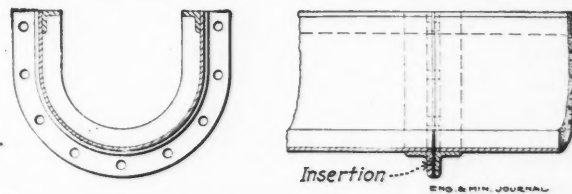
DETAILS OF STEEL AND CONCRETE LAUNDRER
